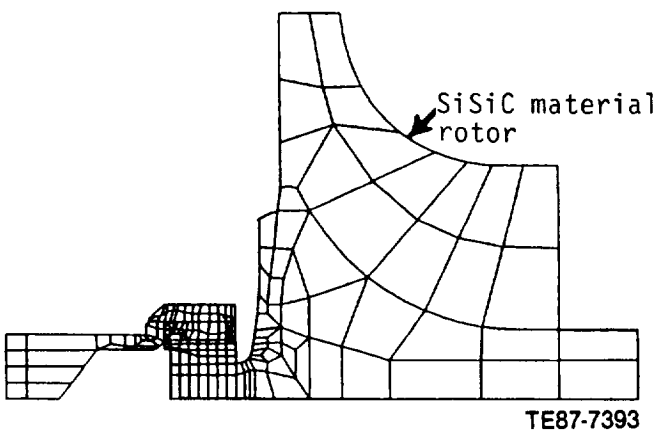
Power turbine assembly, rotor/shaft assembly, 2-D finite element model, SiSiC rotor.
